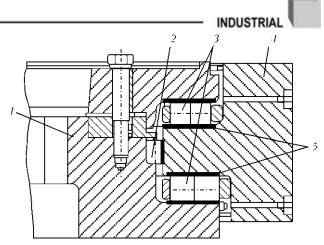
Schematic of rotary support: 1 - gear ring; 2 - vertical rollers; 3 - horizontal rollers; 4 - connection ring; 5 - wear locations
